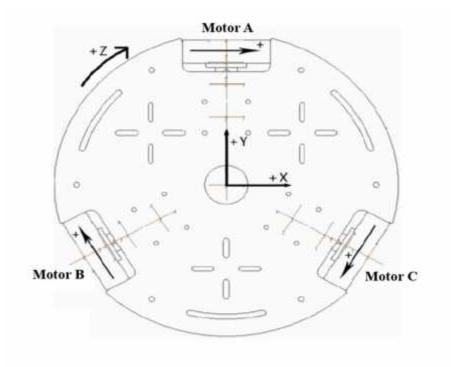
Location of motor and axis direction for mobile robot car
